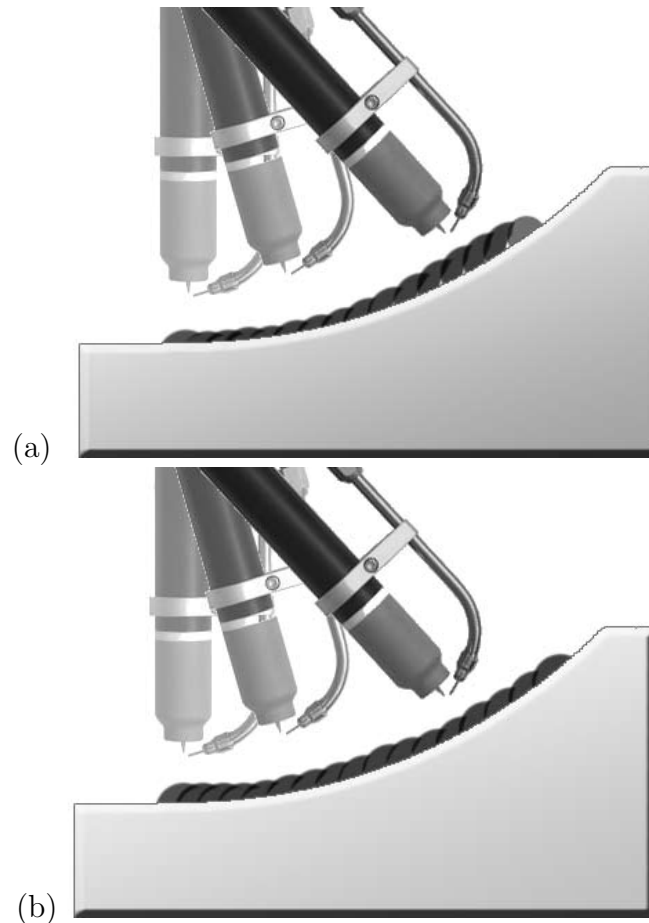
(a) effects of base metal orientation on bead geometry using fixed weld parameters (b) bead geometry effects compensated using variable weld parameters
